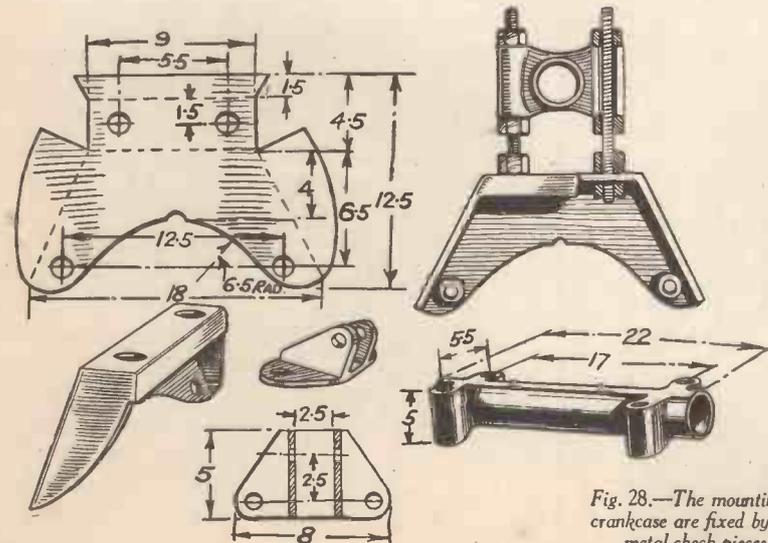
The mounting lugs for the crankcase are fixed by bolts between metal check pieces as shown.
